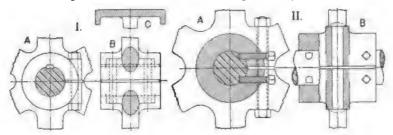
Fly-wheel Hubs for Small Engines. I. Standard design; II. For 15" by 14" engine, Figs. 237, 315, scale 1 to 16.
